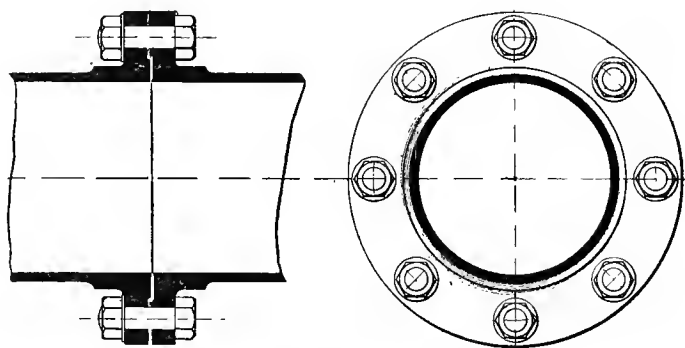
SOLID WELDED FLANGE (YATES & THOM).
